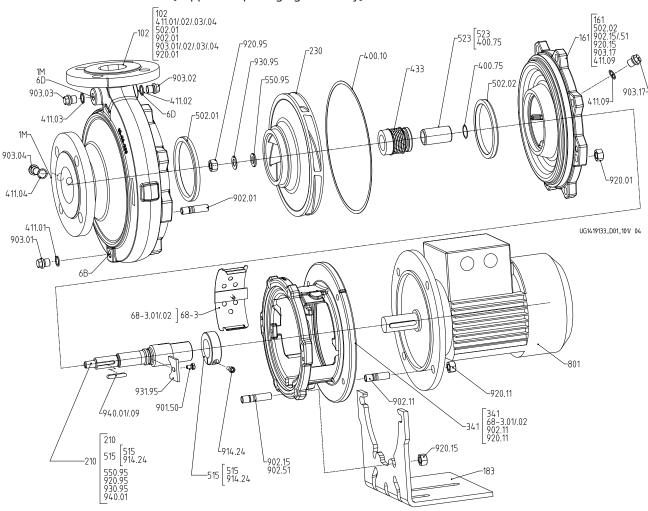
Model with single mechanical seal and bolted casing cover, without pump foot
